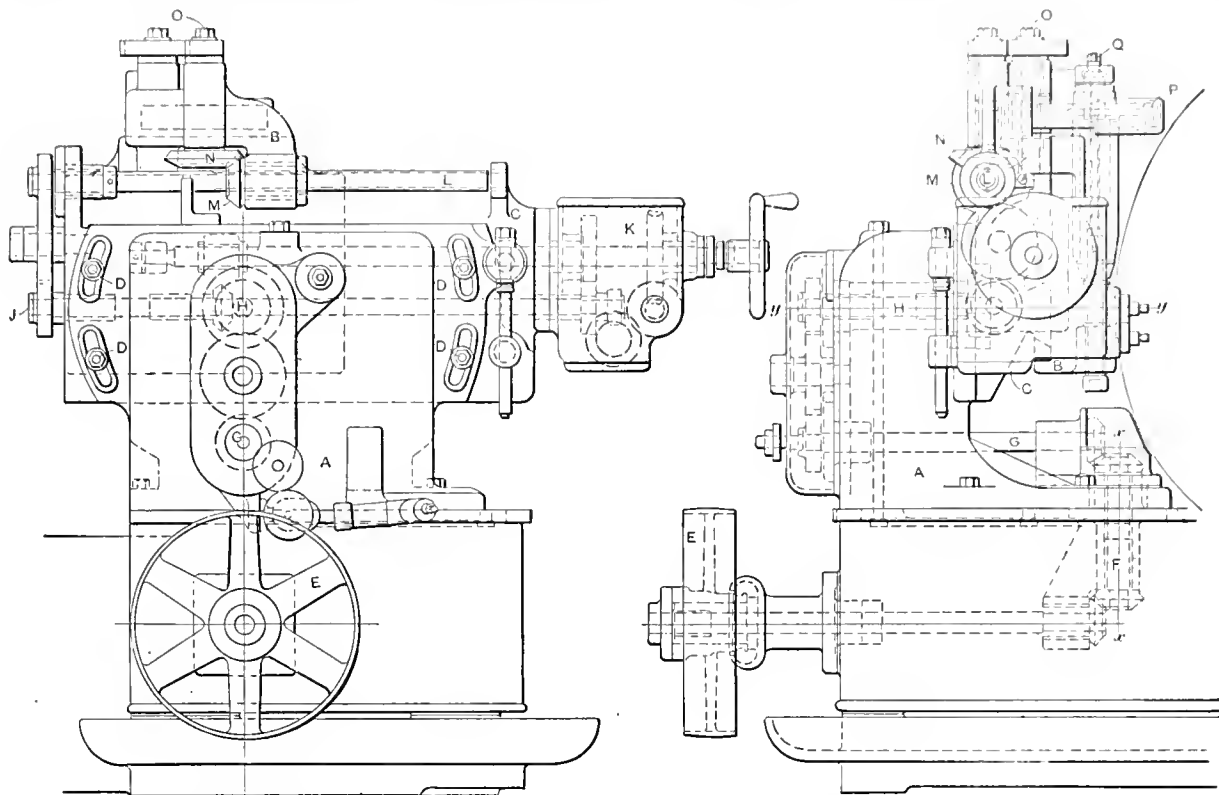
Front and Side Elevation of Cutter End of Machine, showing Cutter Slide Adjustments and Method of Driving.
